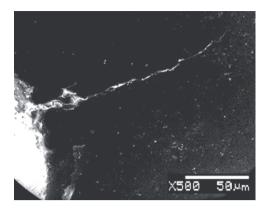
Working surface of the testing die-casting die. Surface crack and pits. SEM
